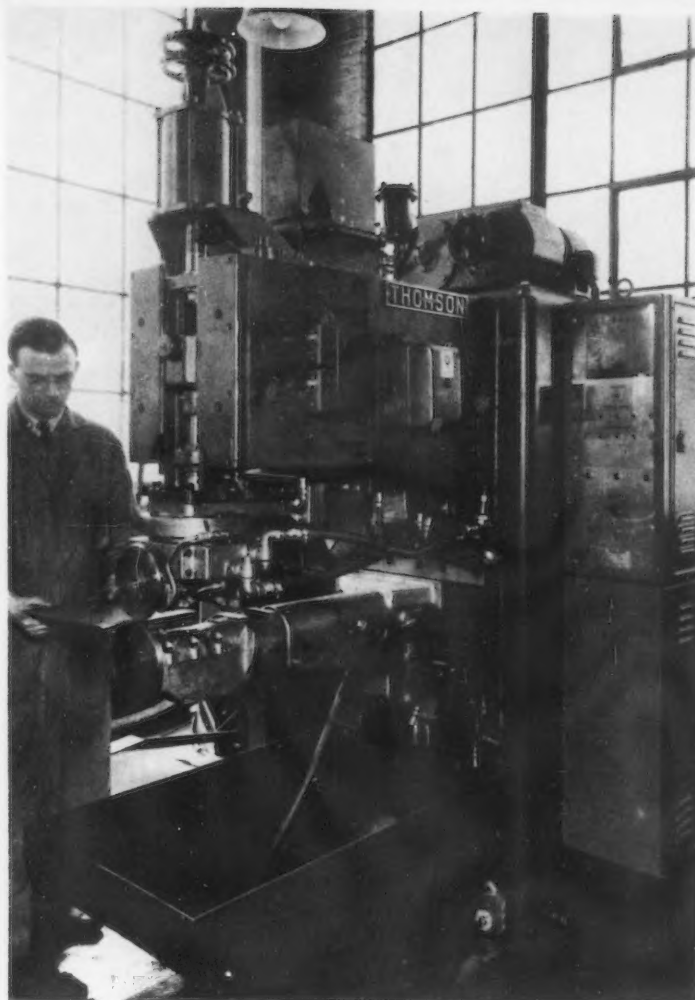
The upper section of this synchronous seam welder control, side-mounted to a standard seam welding machine, is hinge-mounted to the side of the welder so it can be swung out.
